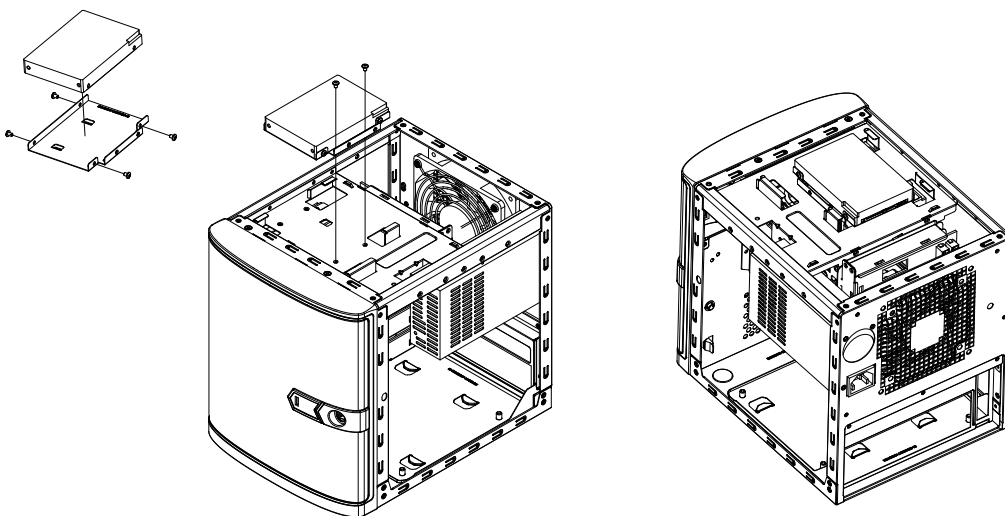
Installing a Drive Carrier into the Hard Drive Cage
